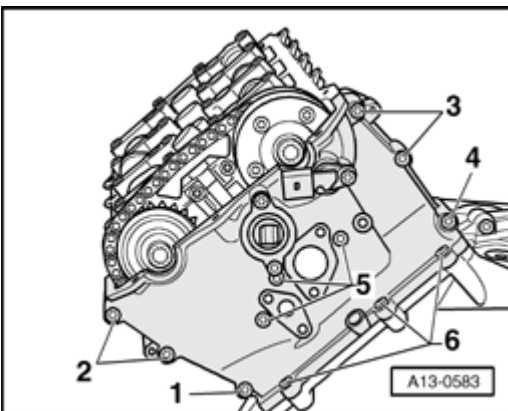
Removing/Installing Bolts And Left Timing Chain Cover
